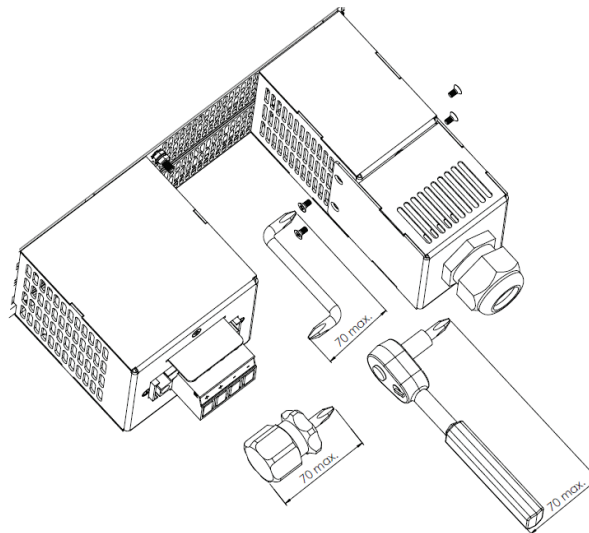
Strain Relief Assembly Maximum Tools Length
